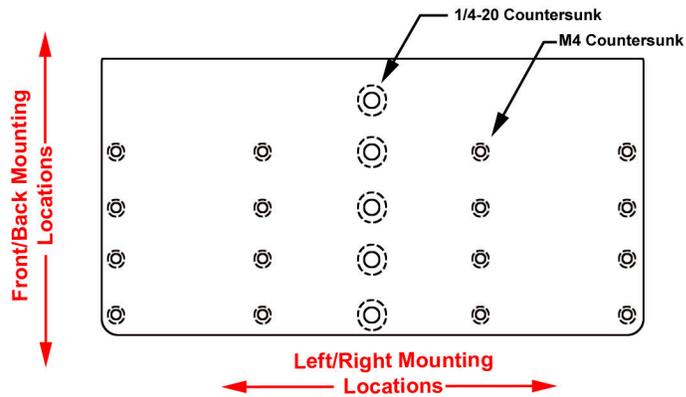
MedView Mounting Bracket Top Plate Access Holes
